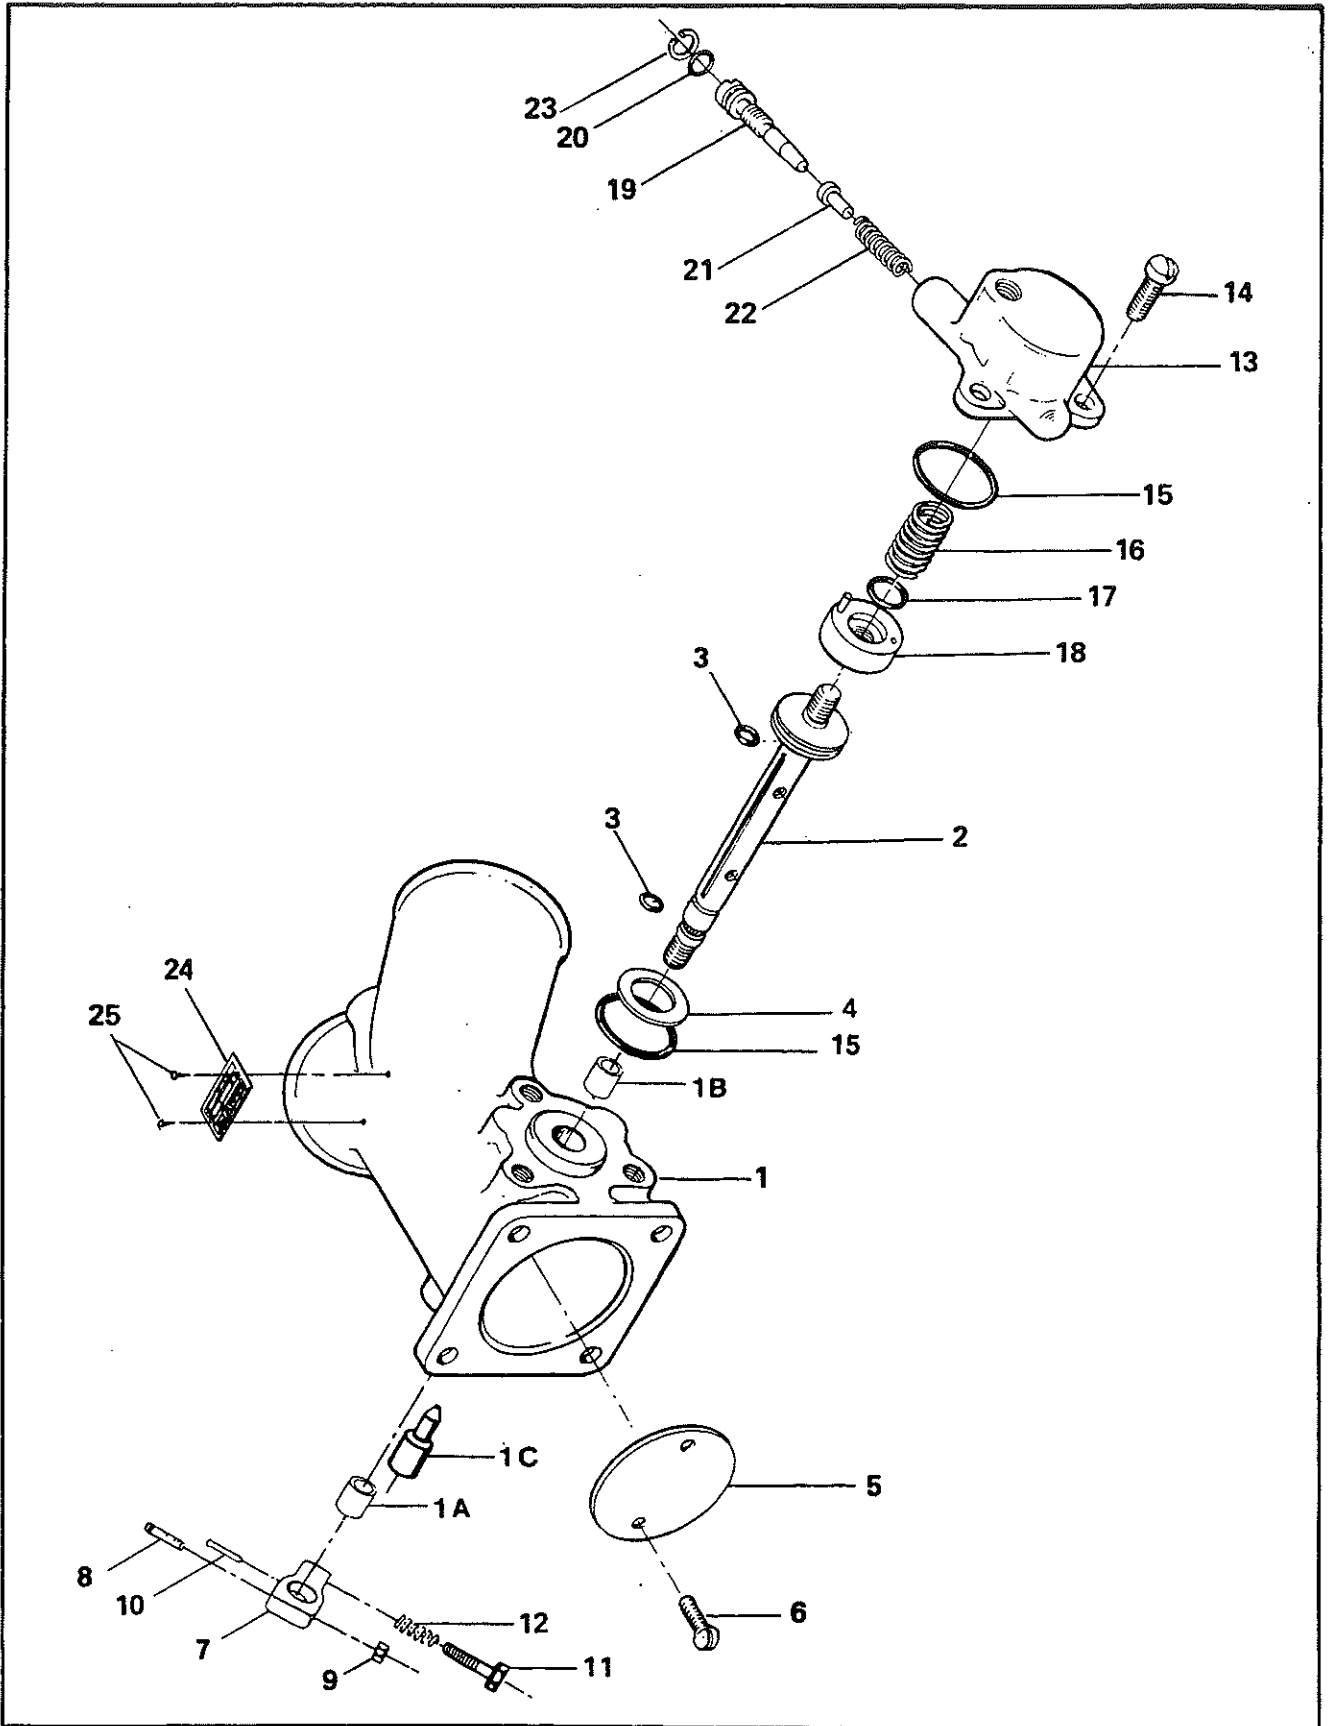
AIR THROTTLE & FUEL METERING ASSEMBLY.
